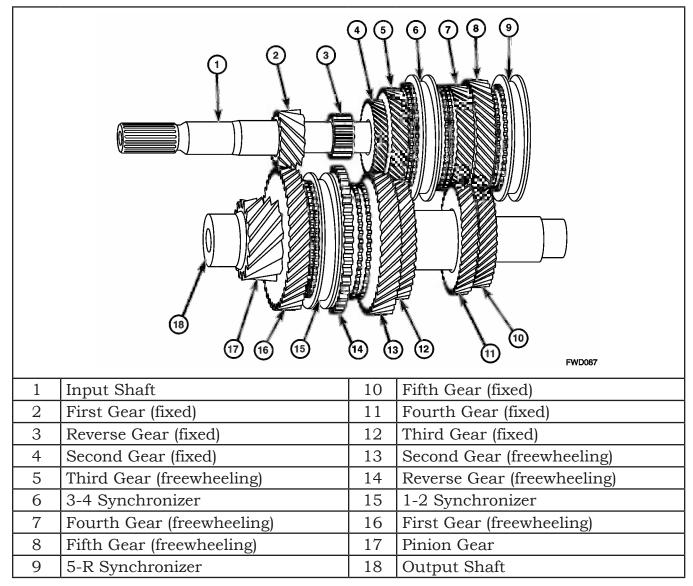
T350/T355 Input Shaft, Output Shaft, and Synchronizer Assemblies
